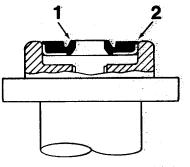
Burnishing Upper and Lower Bushings Using Burnisher Tool.
